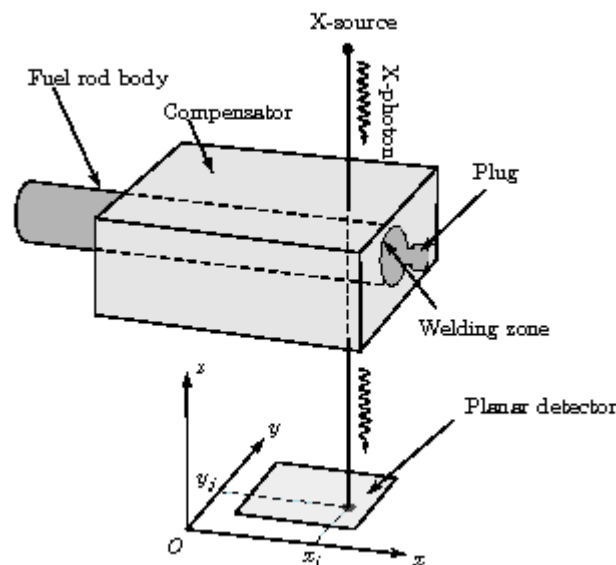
Geometry of the nuclear fuel rod inspection system.
